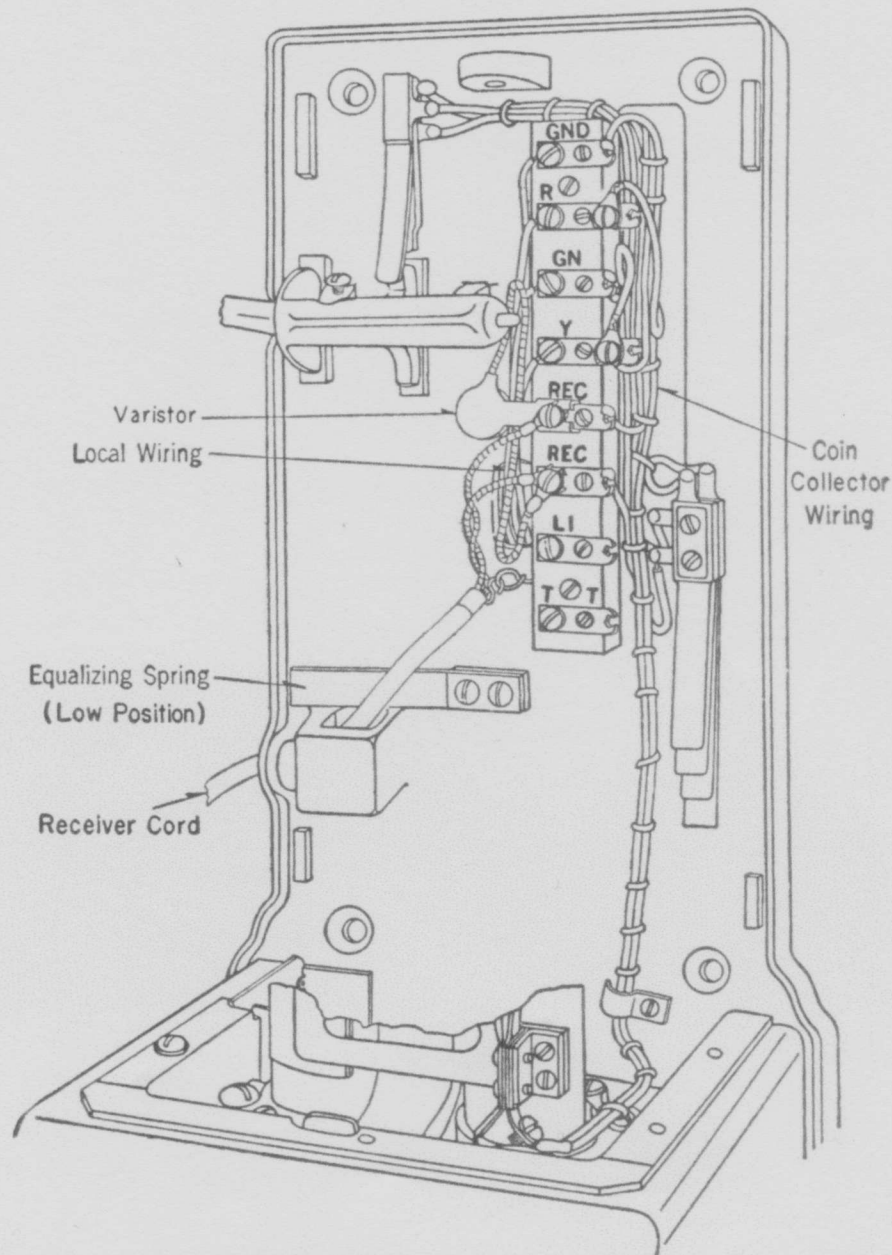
50-type Prepayment Coin Collector—Lower Housing and Backplate Assembly
